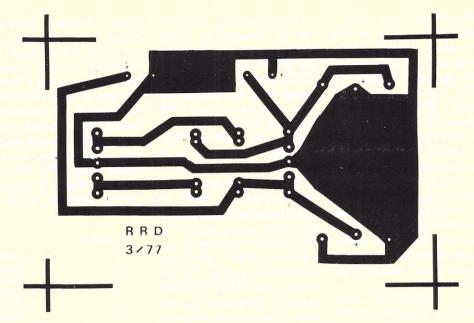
Full-size printed circuit foil pattern for the rectifier-filter PC board.
